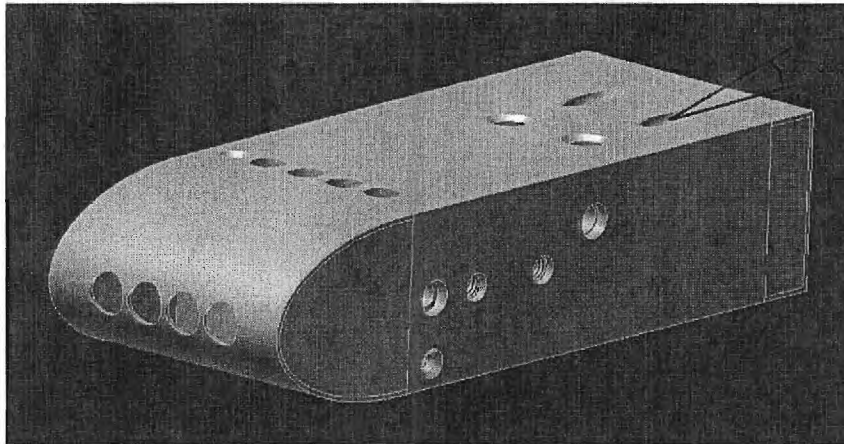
3D CAD Drawing of CFIS Flameholder Configuration Four Showing Angled Carburetor Exits
